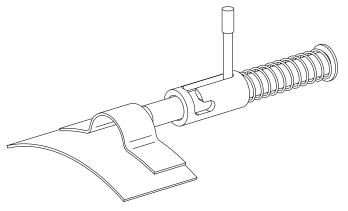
FRONT GUIDE WHEEL UNIT
